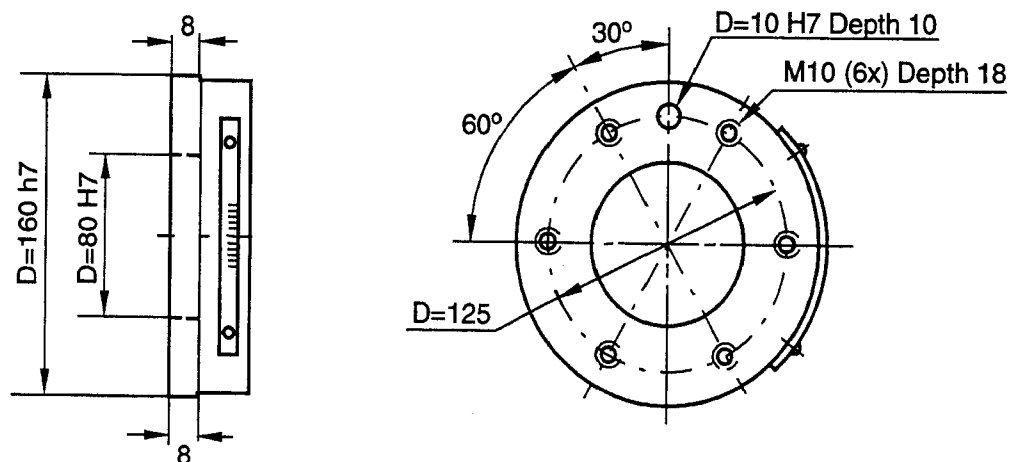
The mechanical interface (mounting flange) ISO 9409. (Dimensions in mm).
